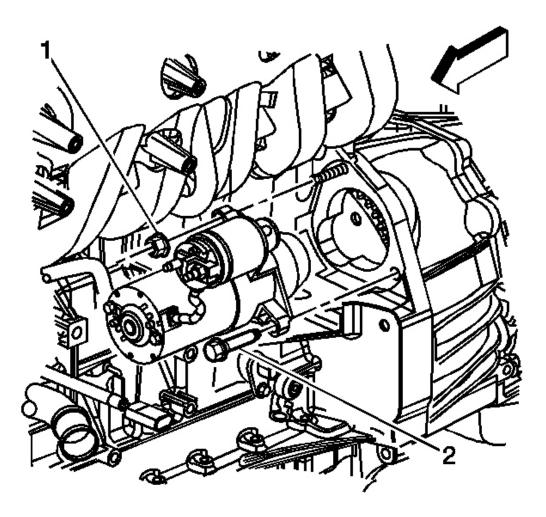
View Of Starter Mount Bolt & Nut Courtesy of GENERAL MOTORS CORP.
